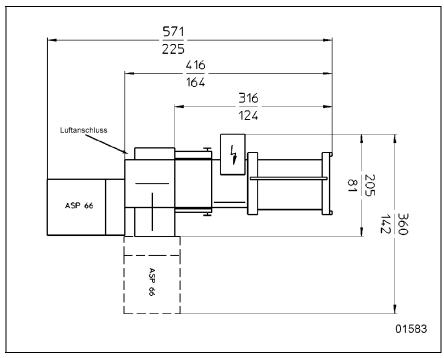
Floor plan K 800.2 - Palletized feeder (measure cm)
